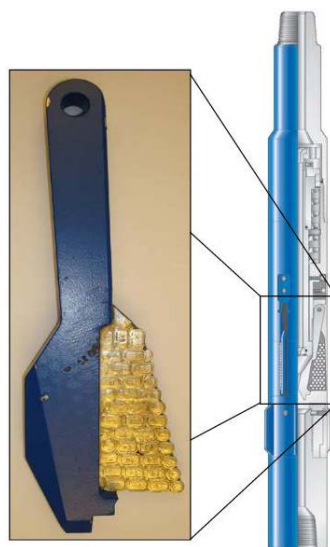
Zoomed cutter and section mill (Stowe & Ponder, 2011)
